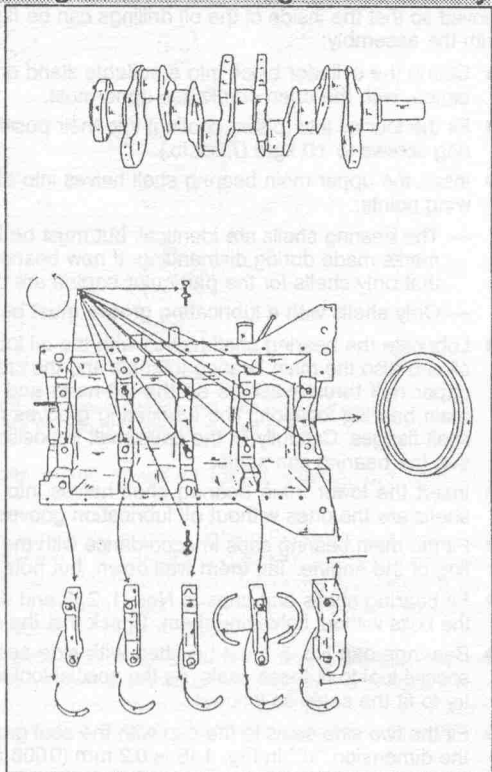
View of the crankshaft together with crankshaft bearings and thrust washers.
